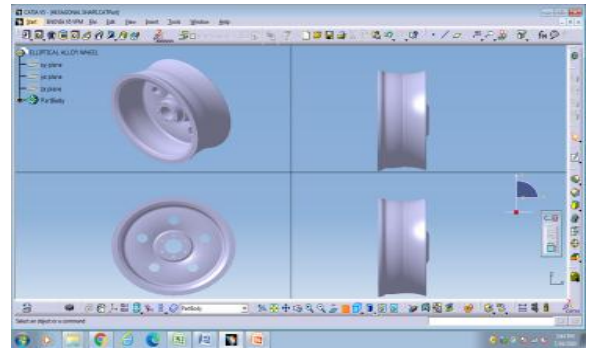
HEXAGONAL SPOKES SHAPE ALLOY WHEEL RIM
